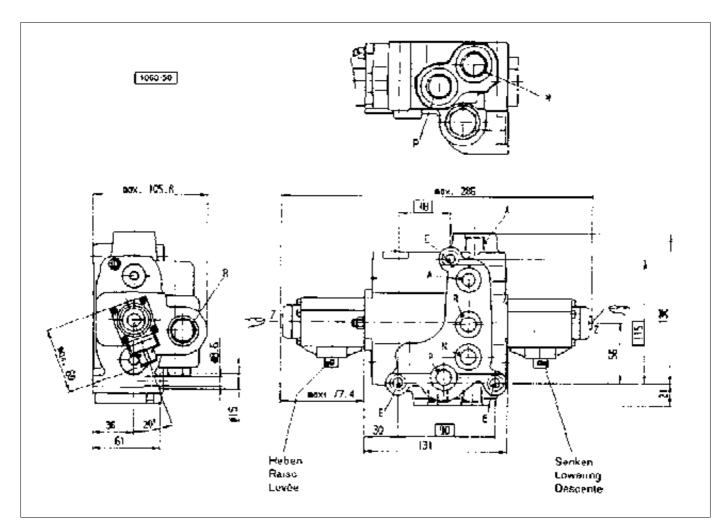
Dimensioned diagram of hydraulic directional control valve.
